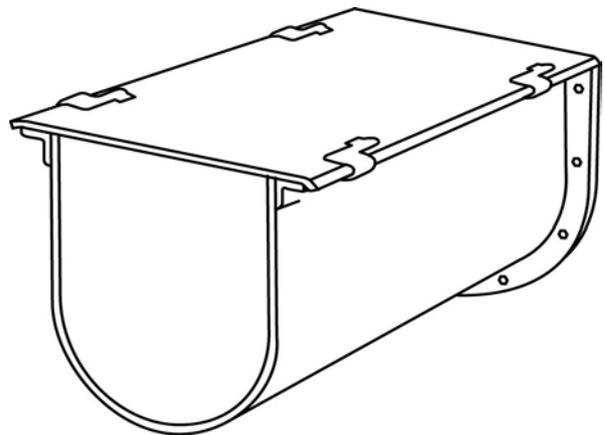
Angle Flanged Type Trough With Semi-Flanged Cover Spring Clamped [ANSI/CEMA 350-2009 (Figure 4. 16D)]
